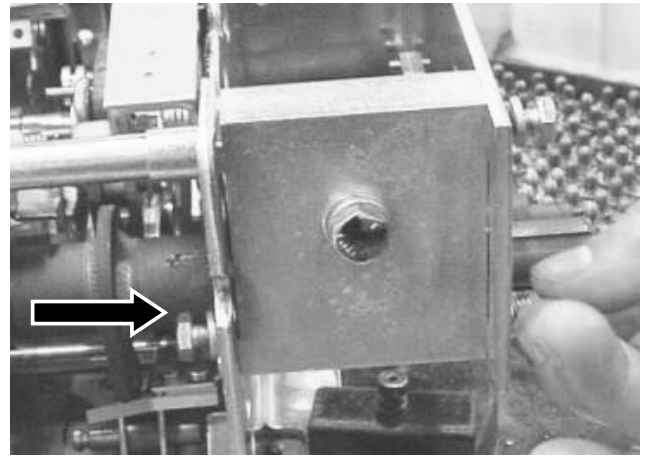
Illustration of Bolt on Handle Side of Assembly Wall
